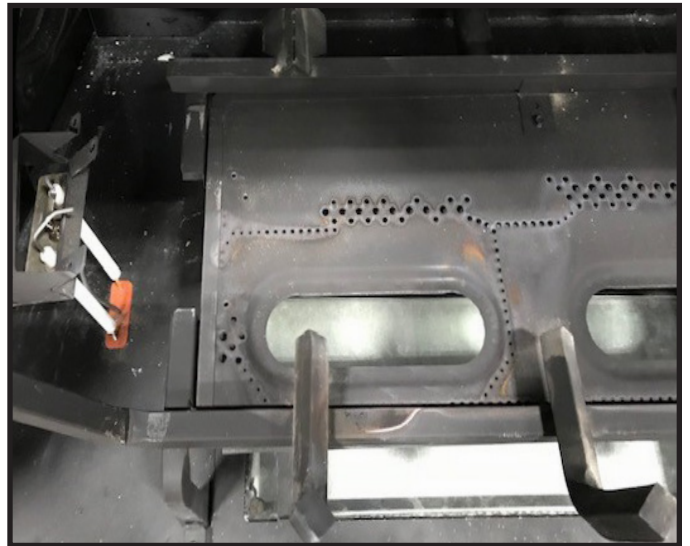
Pilot Assembly / Hood detached and moved away from Burner and Grate
